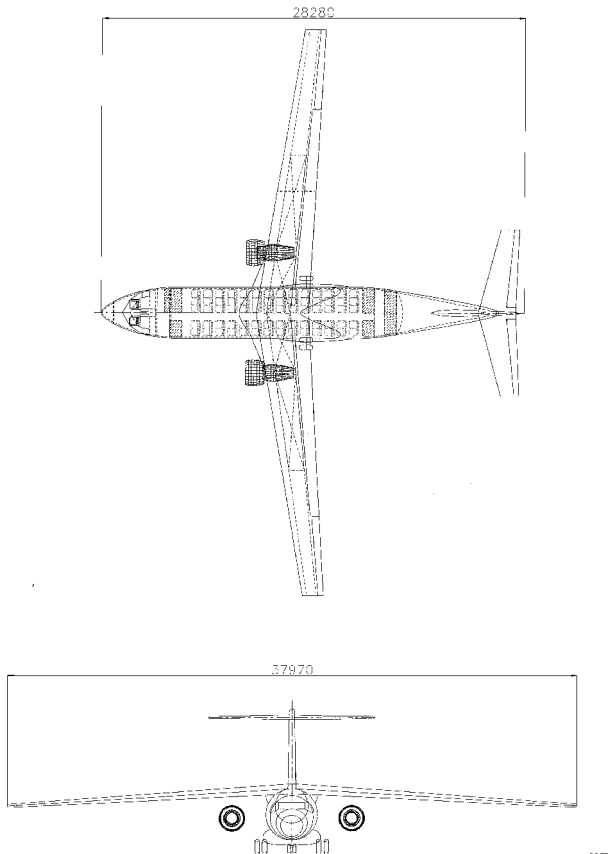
The GARTEUR benchmark aircraft ($AR = 15.5$), dimensions in millimeters.
